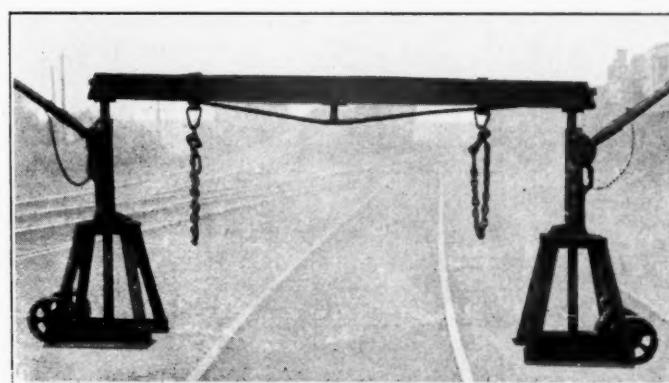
Arrangement of Jacks for Use in Changing Truck Wheels
